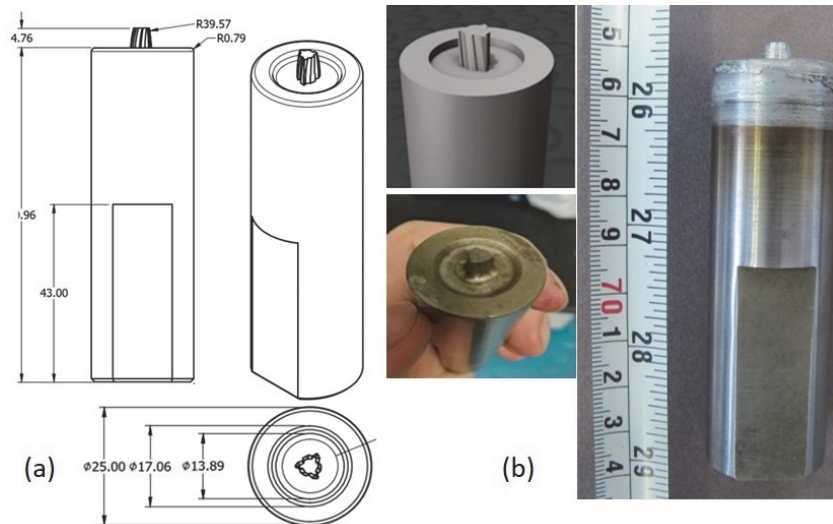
H13 FSW tool employed to produce the welds: a) CAD draws, b) real tool.
